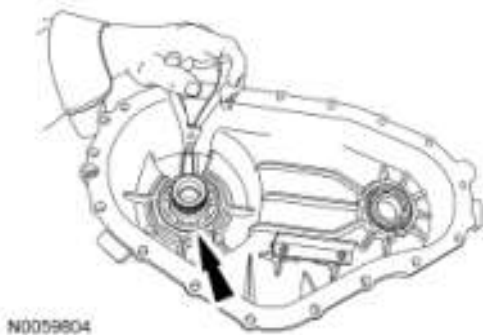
Expand Snap Ring & Remove The Output Shaft & Bearing
